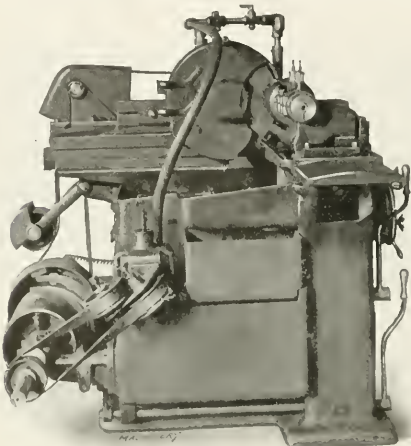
Modern 8- by 18 inch Grinder, showing Main Drive, Wheel Base and Pump
